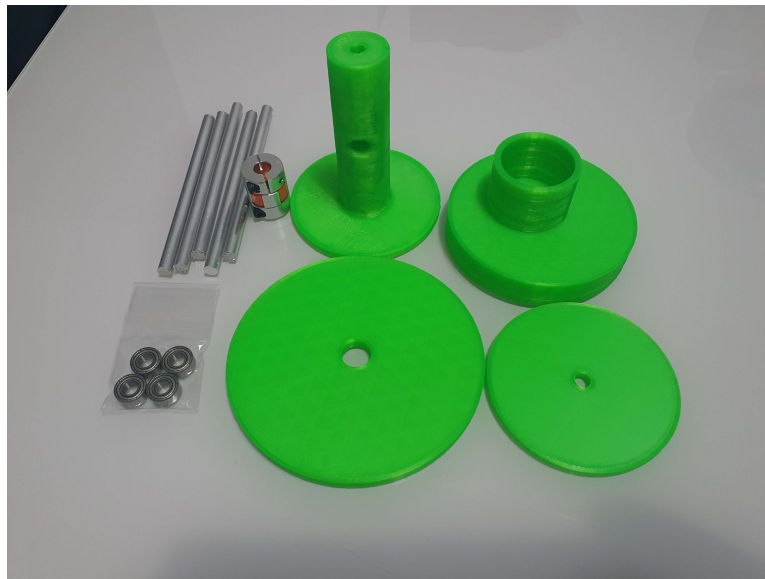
Printed parts with metal bar, spider coupler and bearings.
